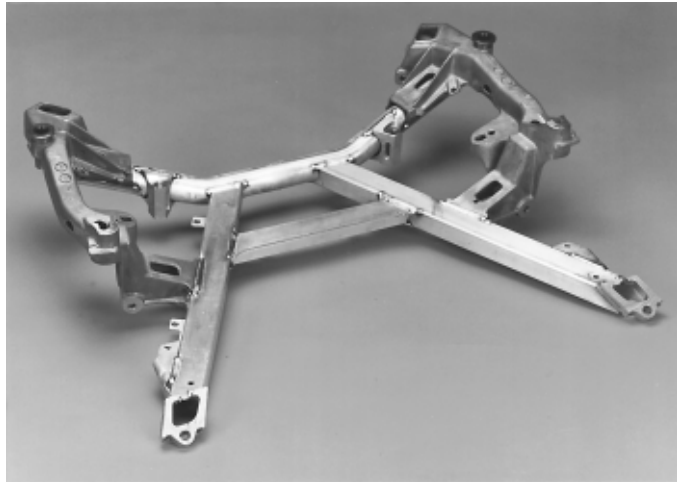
Welded 6063 extrusions combined with 5083 tube and 357 casting make up the axle body assembly for the BMW Model 5.
